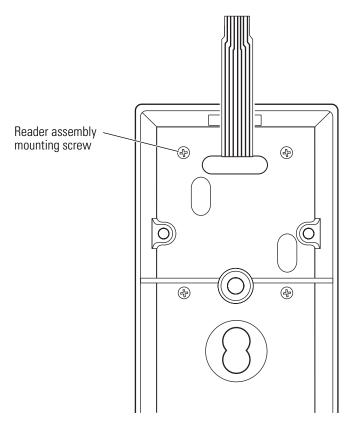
Removing and reinstalling the screws for the B.A.S.I.S. smart card reader assembly
